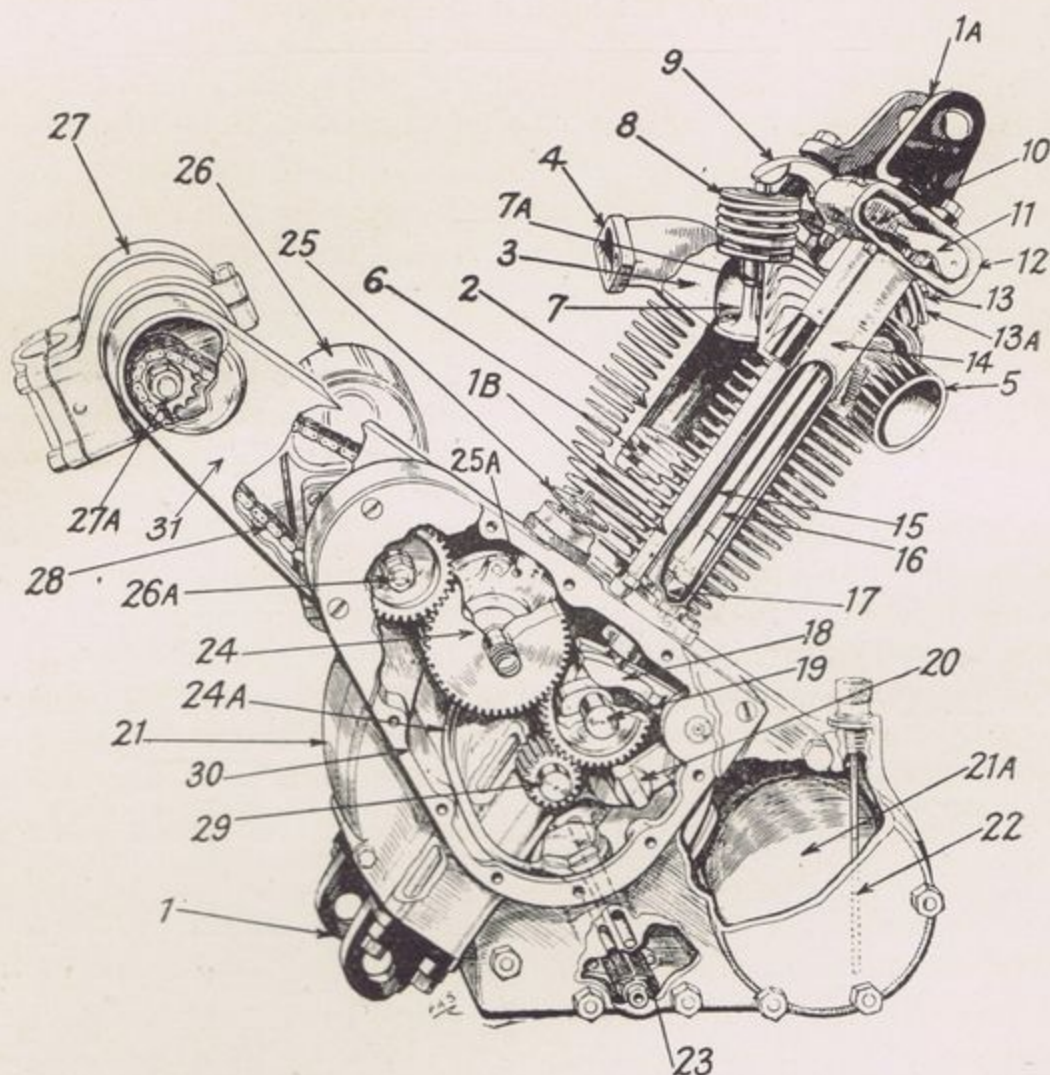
CUT-AWAY VIEW OF STANDARD O.H.V. "PANTHER" ENGINE
